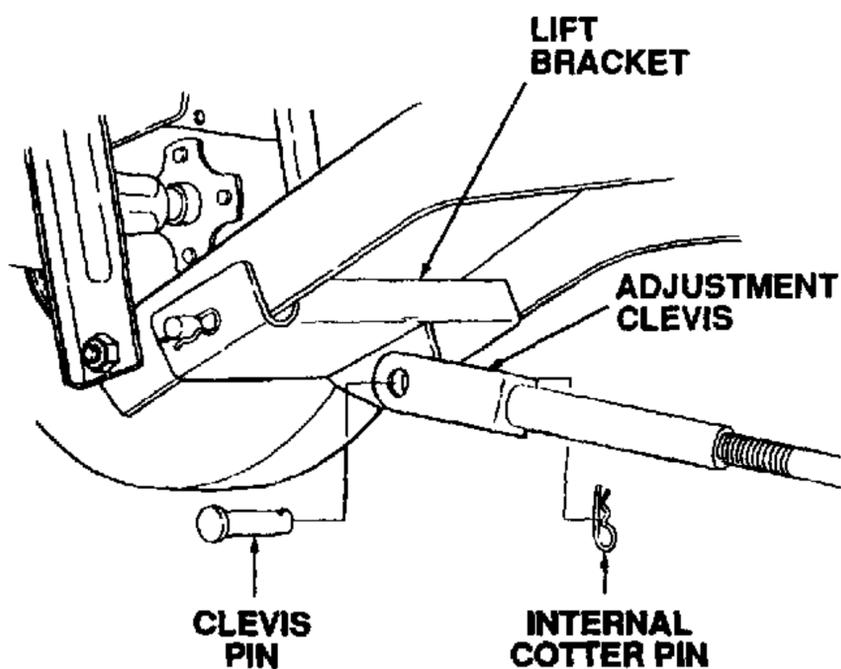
Attaching Adjustment Rod to Lift Bracket.
